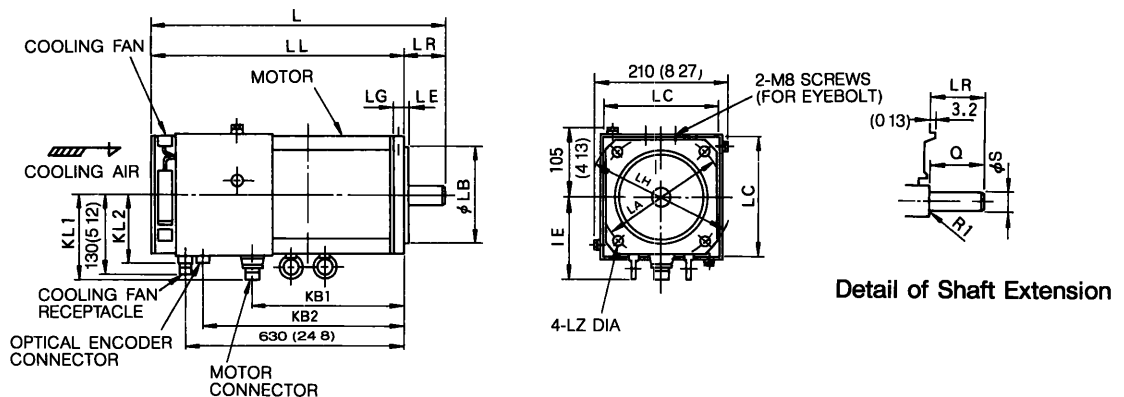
USAMED-12B22 to -44B22 (Straight Shaft)
